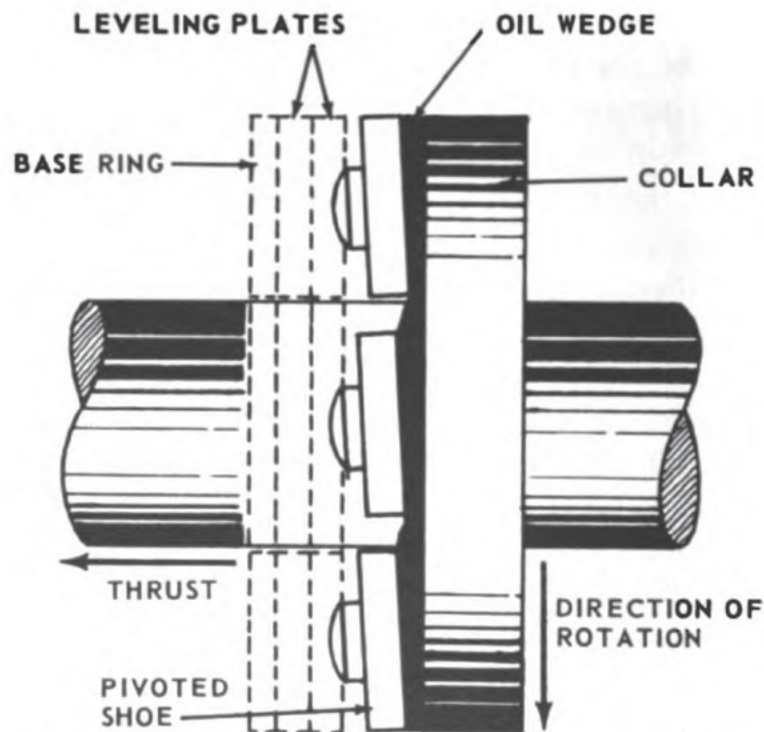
Diagrammatic arrangement of a Kingsbury-type thrust bearing.
